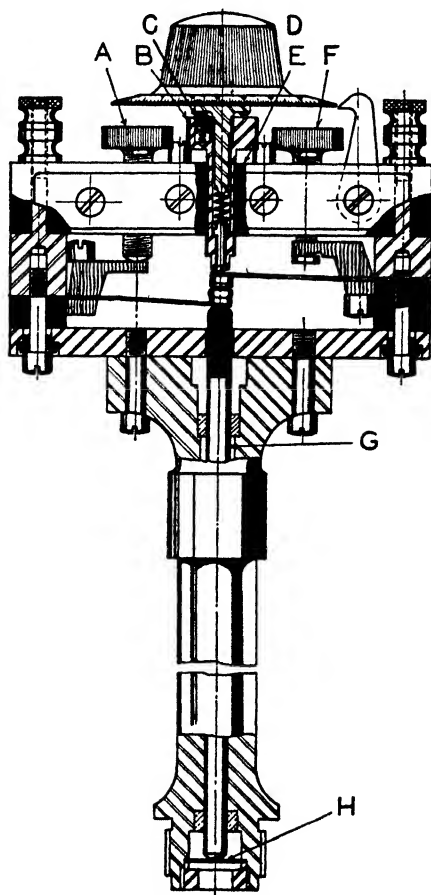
IGNITION INDICATOR FOR CFR DIESEL-FUEL TEST ENGINE.
